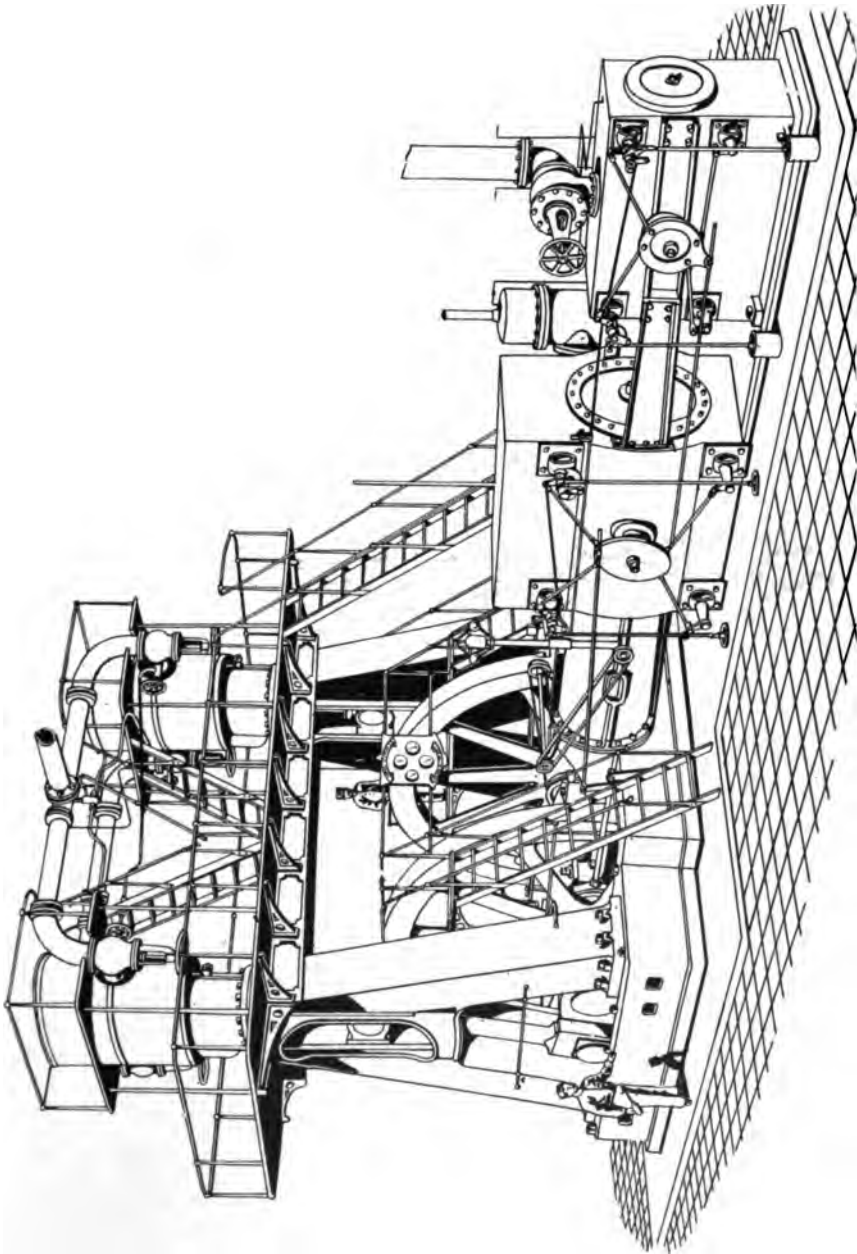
LARGE SIZE MODERN BOYLE MACHINE WITH COMPOUND TANDEM ENGINE—PENNSYLVANIA
